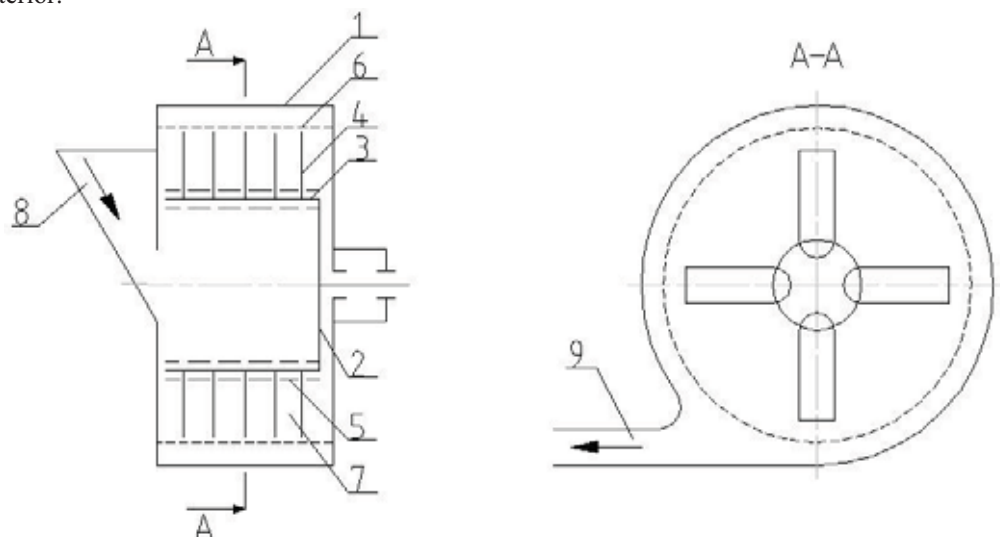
Scheme of beater grinder :1 – housing, 2 – rotor, 3 – bolt, 4 – beater, 5 – sleeve, 6 – screen, 7 – working chamber, 8 – charge, 9 – outlet [1]
